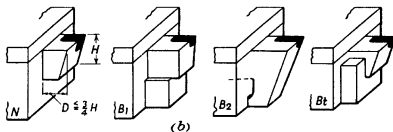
MINIMUM OVERHANG AND RIGID TOOL SUPPORTS
